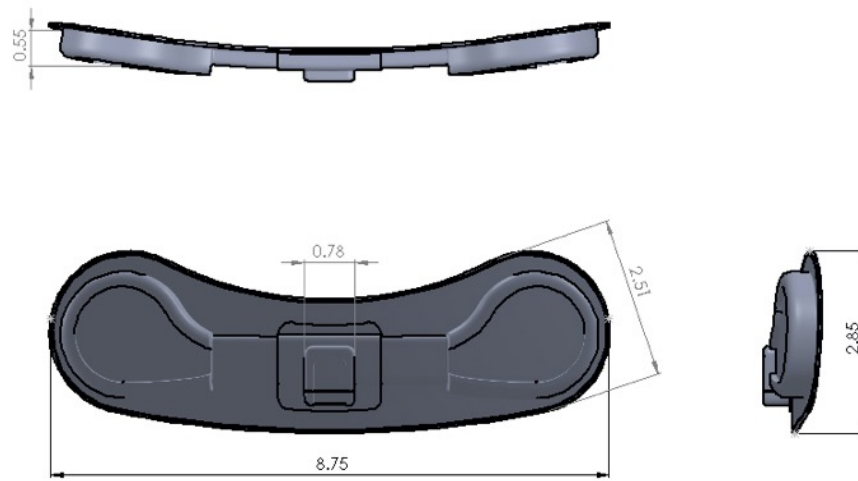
Technical Drawing, Front and Back Cooling Systems
